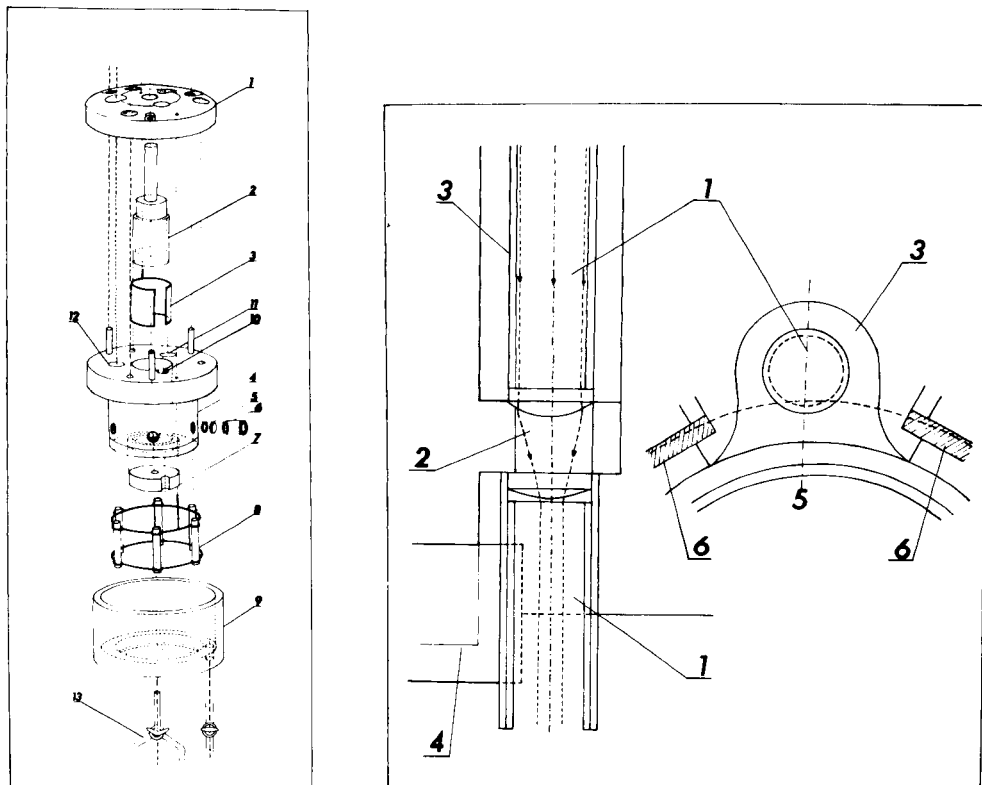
Spectrocoulometric cell design: (1) cover, (2) stirrer, (3) working electrode, (4) body of cell, (5) frits, (6) threaded bush, (7) bottom of the cell, (8) auxiliary electrode, (9) external housing, (10) opening for optical probe, (11) opening for inert gas, (12) opening for reference electrode, (13) three-way stopcock.
